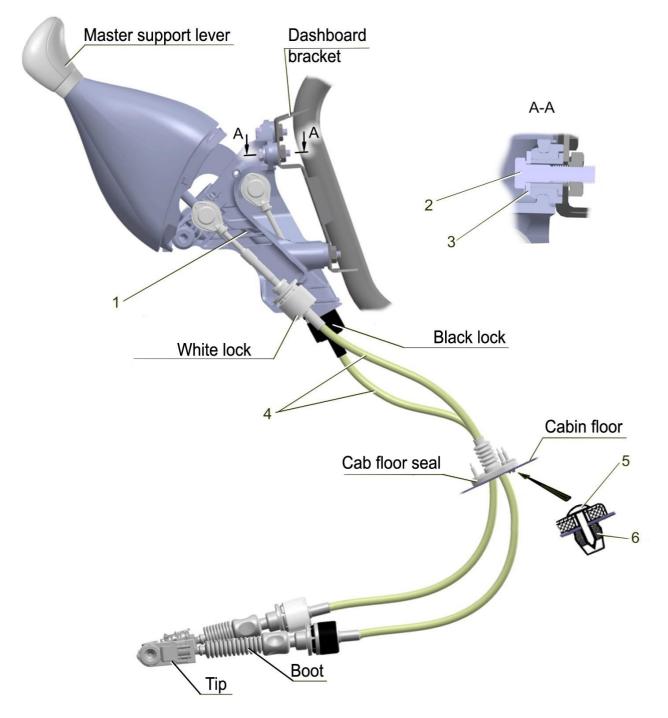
Master support with cables installation: 1– master support; 2– bolts; 3– washers; 4 – cables; 5 – screws; 6 – nuts.
